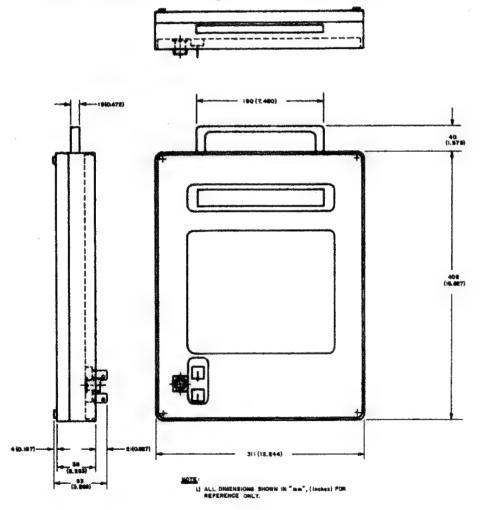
Outline Drawing -- TAM 2 Portable Keyboard/Display
